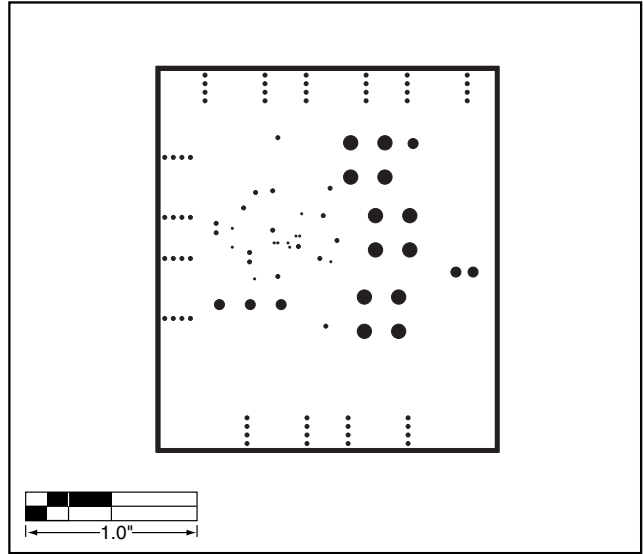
MAX2385/MAX2386 EV Kit PC Board Layout—Ground Plane 1
